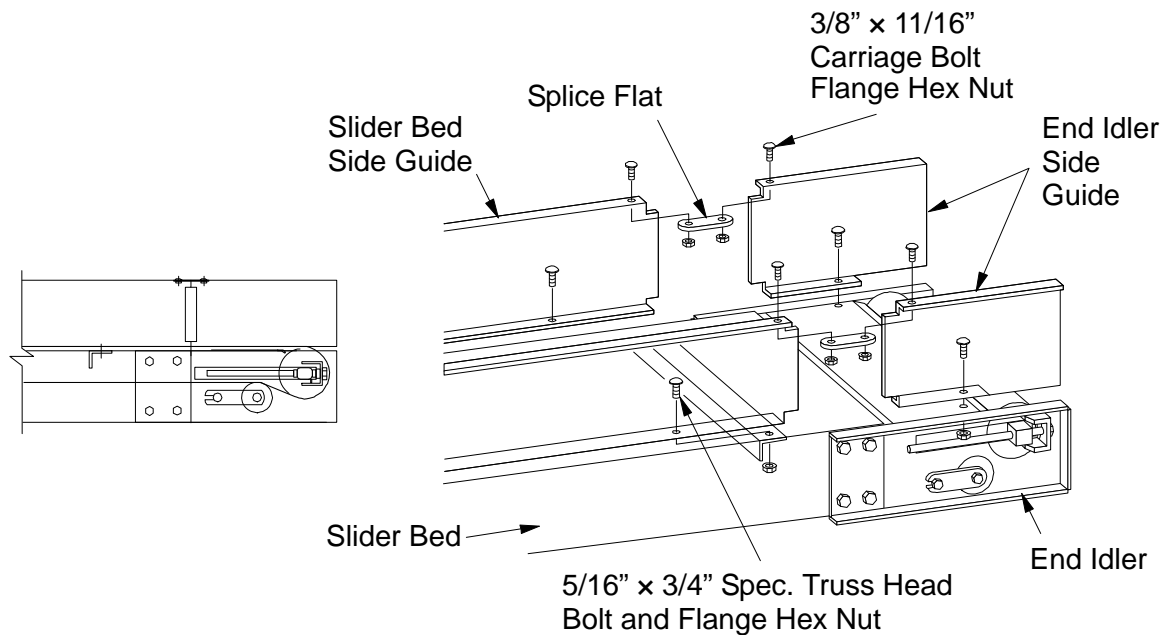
End Idler and End Take-Up Side Guide Assembly
